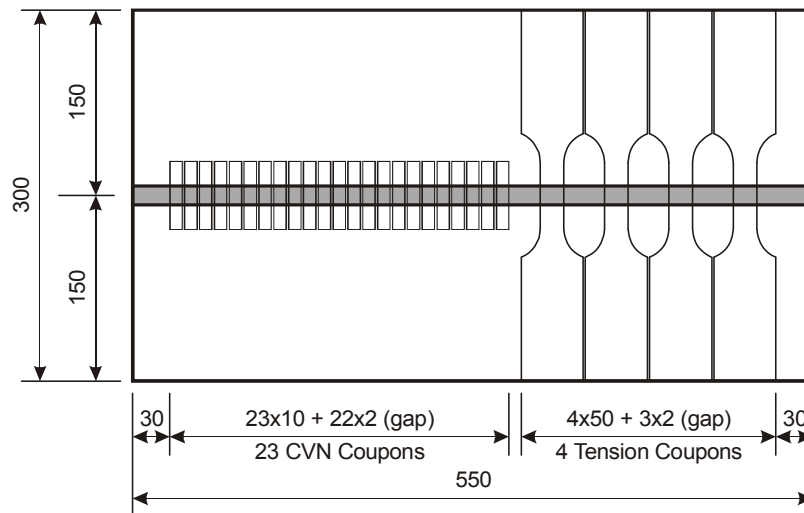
Tension and CVN coupons machined from the welded plates.
